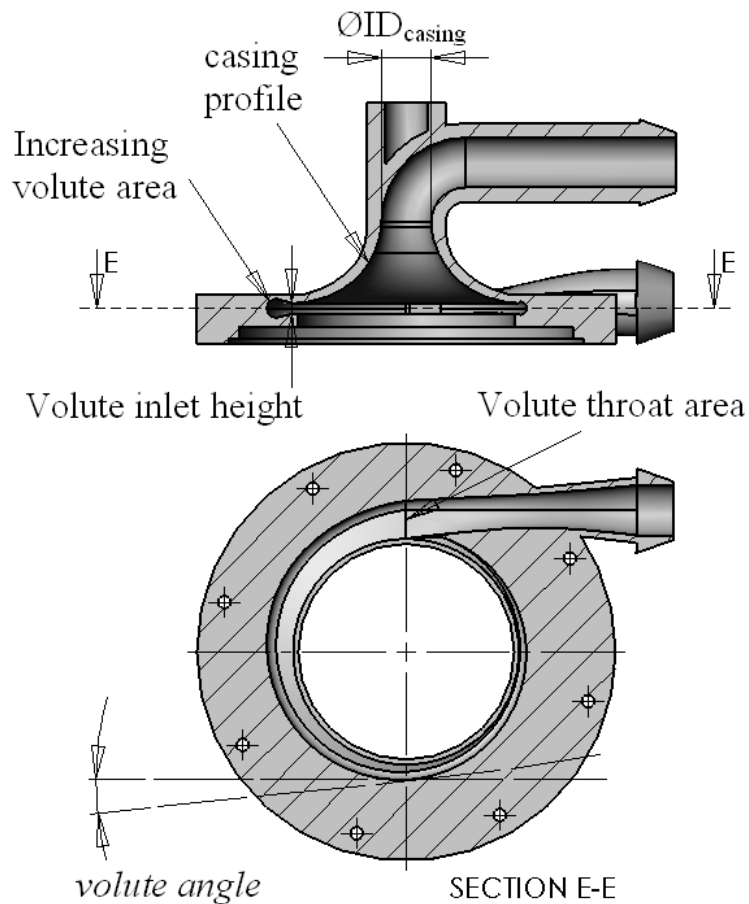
Sectioned side and plan views of a completed CAD model of a dimensioned casing that was used for testing.
